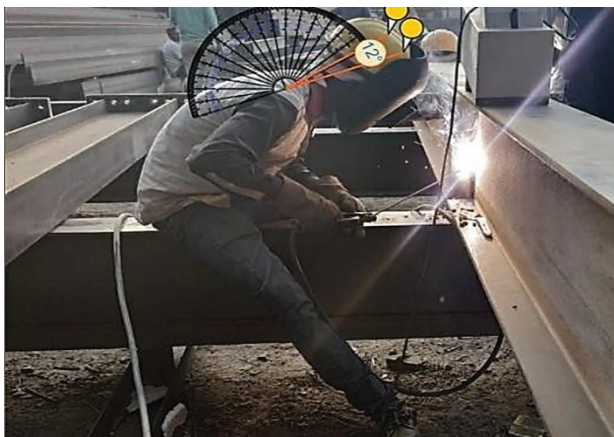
Bending down posture of welding worker (Head Angle)
